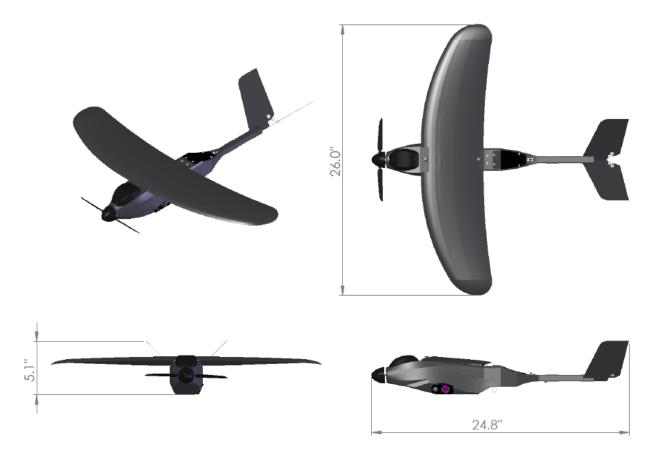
Schematic drawing of ARA's Nighthawk UAS showing overall dimensions.
